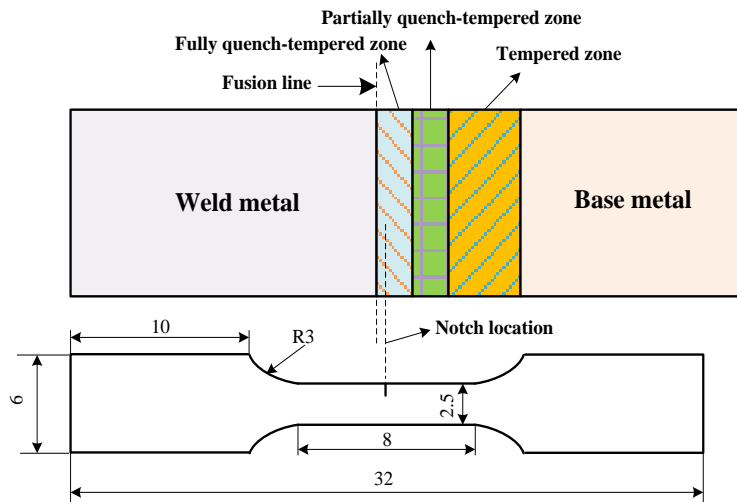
Shape, dimensions and location of the miniature specimen for in-situ fatigue test.
